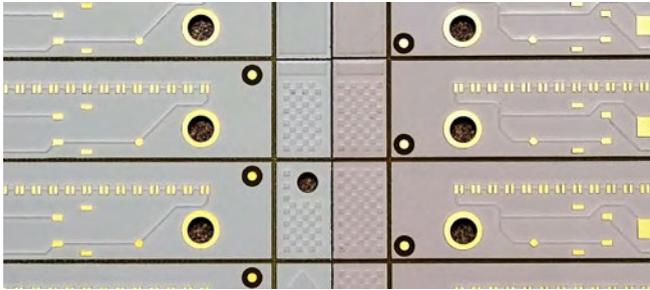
"Pinking" solder mask on ENIG board with multiple reflow cycles.
